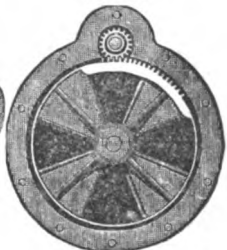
shows a valve in which the parts involved in friction do not come in contact with gas. Fig. 1186 shows the Eddy valve, which is seated by a rocking bar at the back, operated by the plunger screw.
